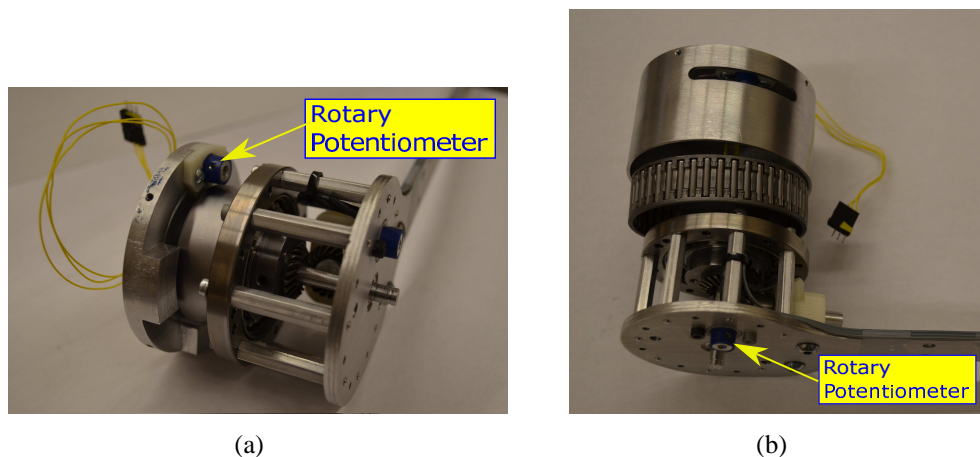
Gear assembly of the device with (a) rotary potentiometer to measure spring deflection and (b) rotary potentiometer to measure the knee angle.
